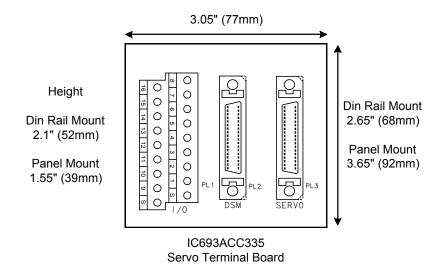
Digital Axis Terminal Board with Mounting Dimensions
